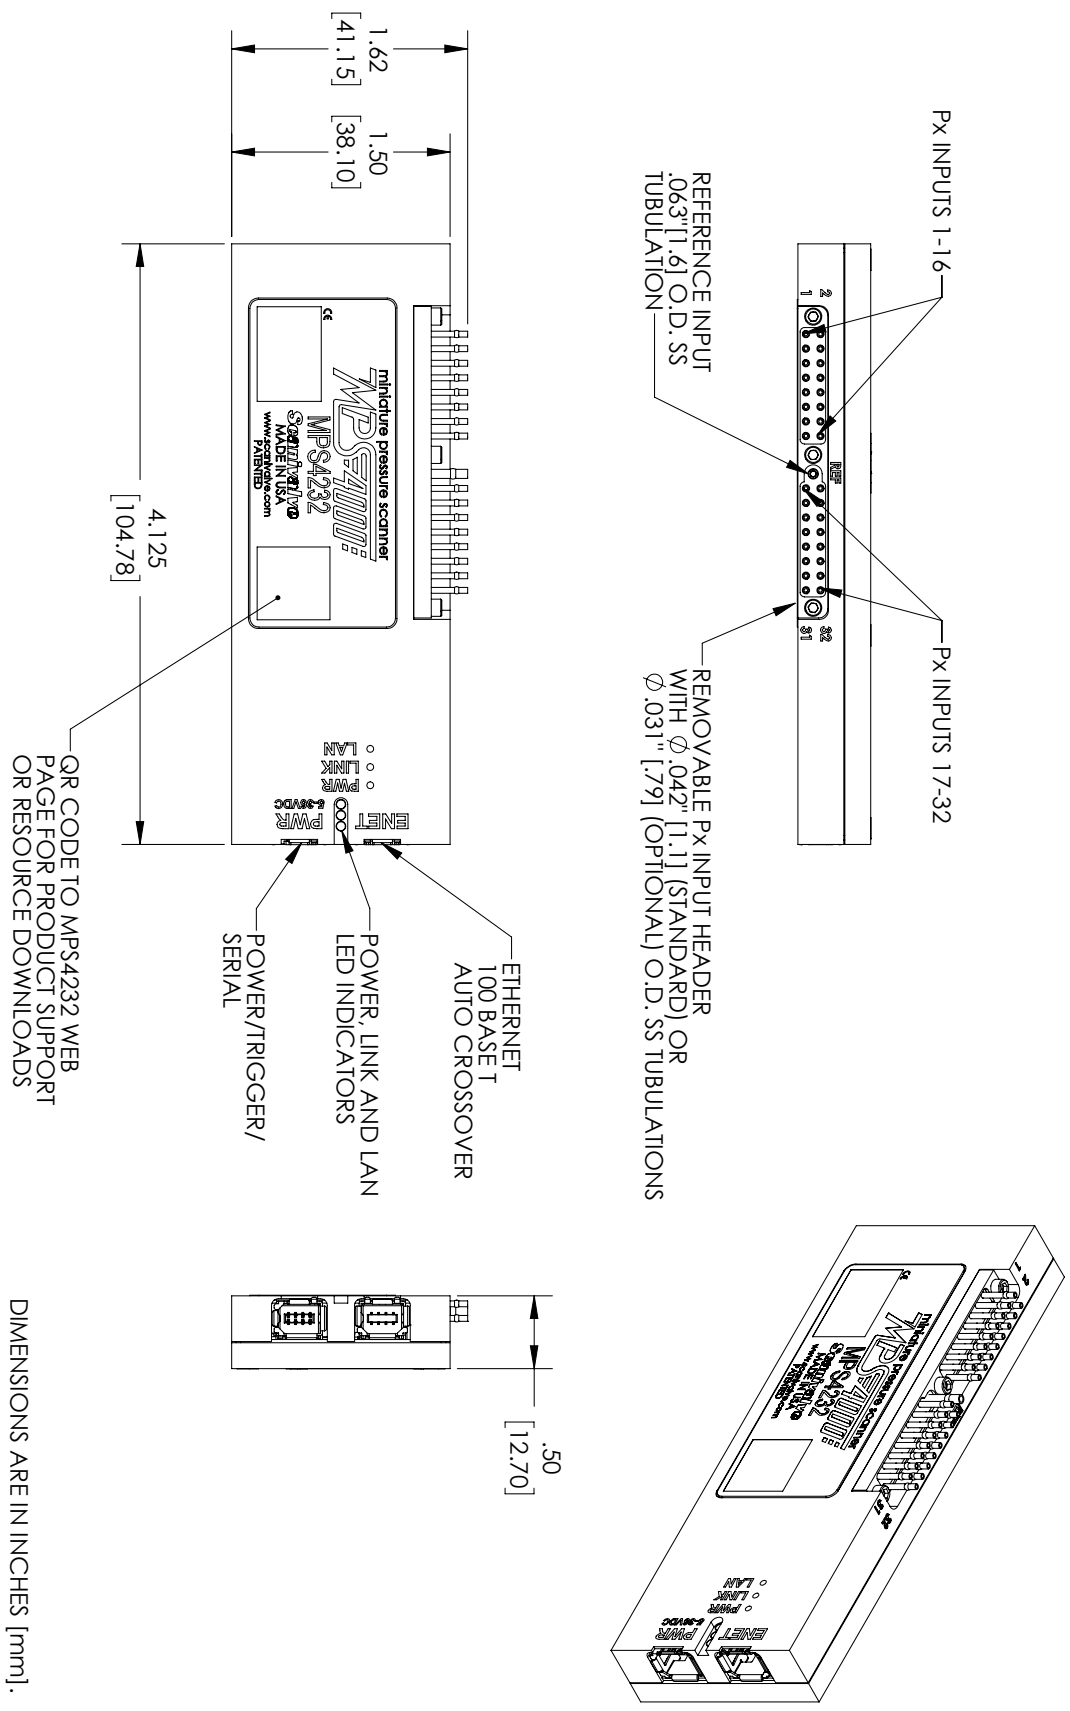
MPS4232 DIMENSIONAL DRAWING
